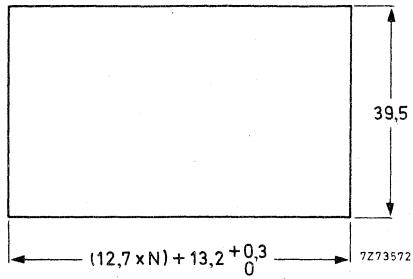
Panel cut-out for T switches and end-pieces with brackets.
